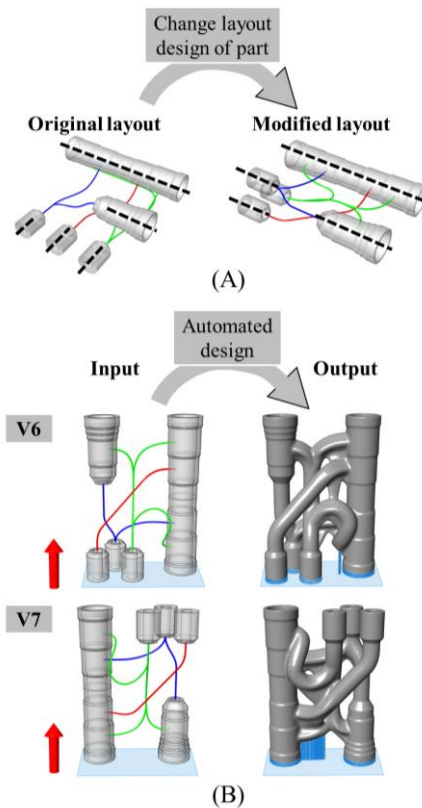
(A) Modification of original layout design by aligning valve bodies and threads along parallel axes; (B) Automated transfer of modified layout design into manufacturable manifold designs (V6 & V7).
